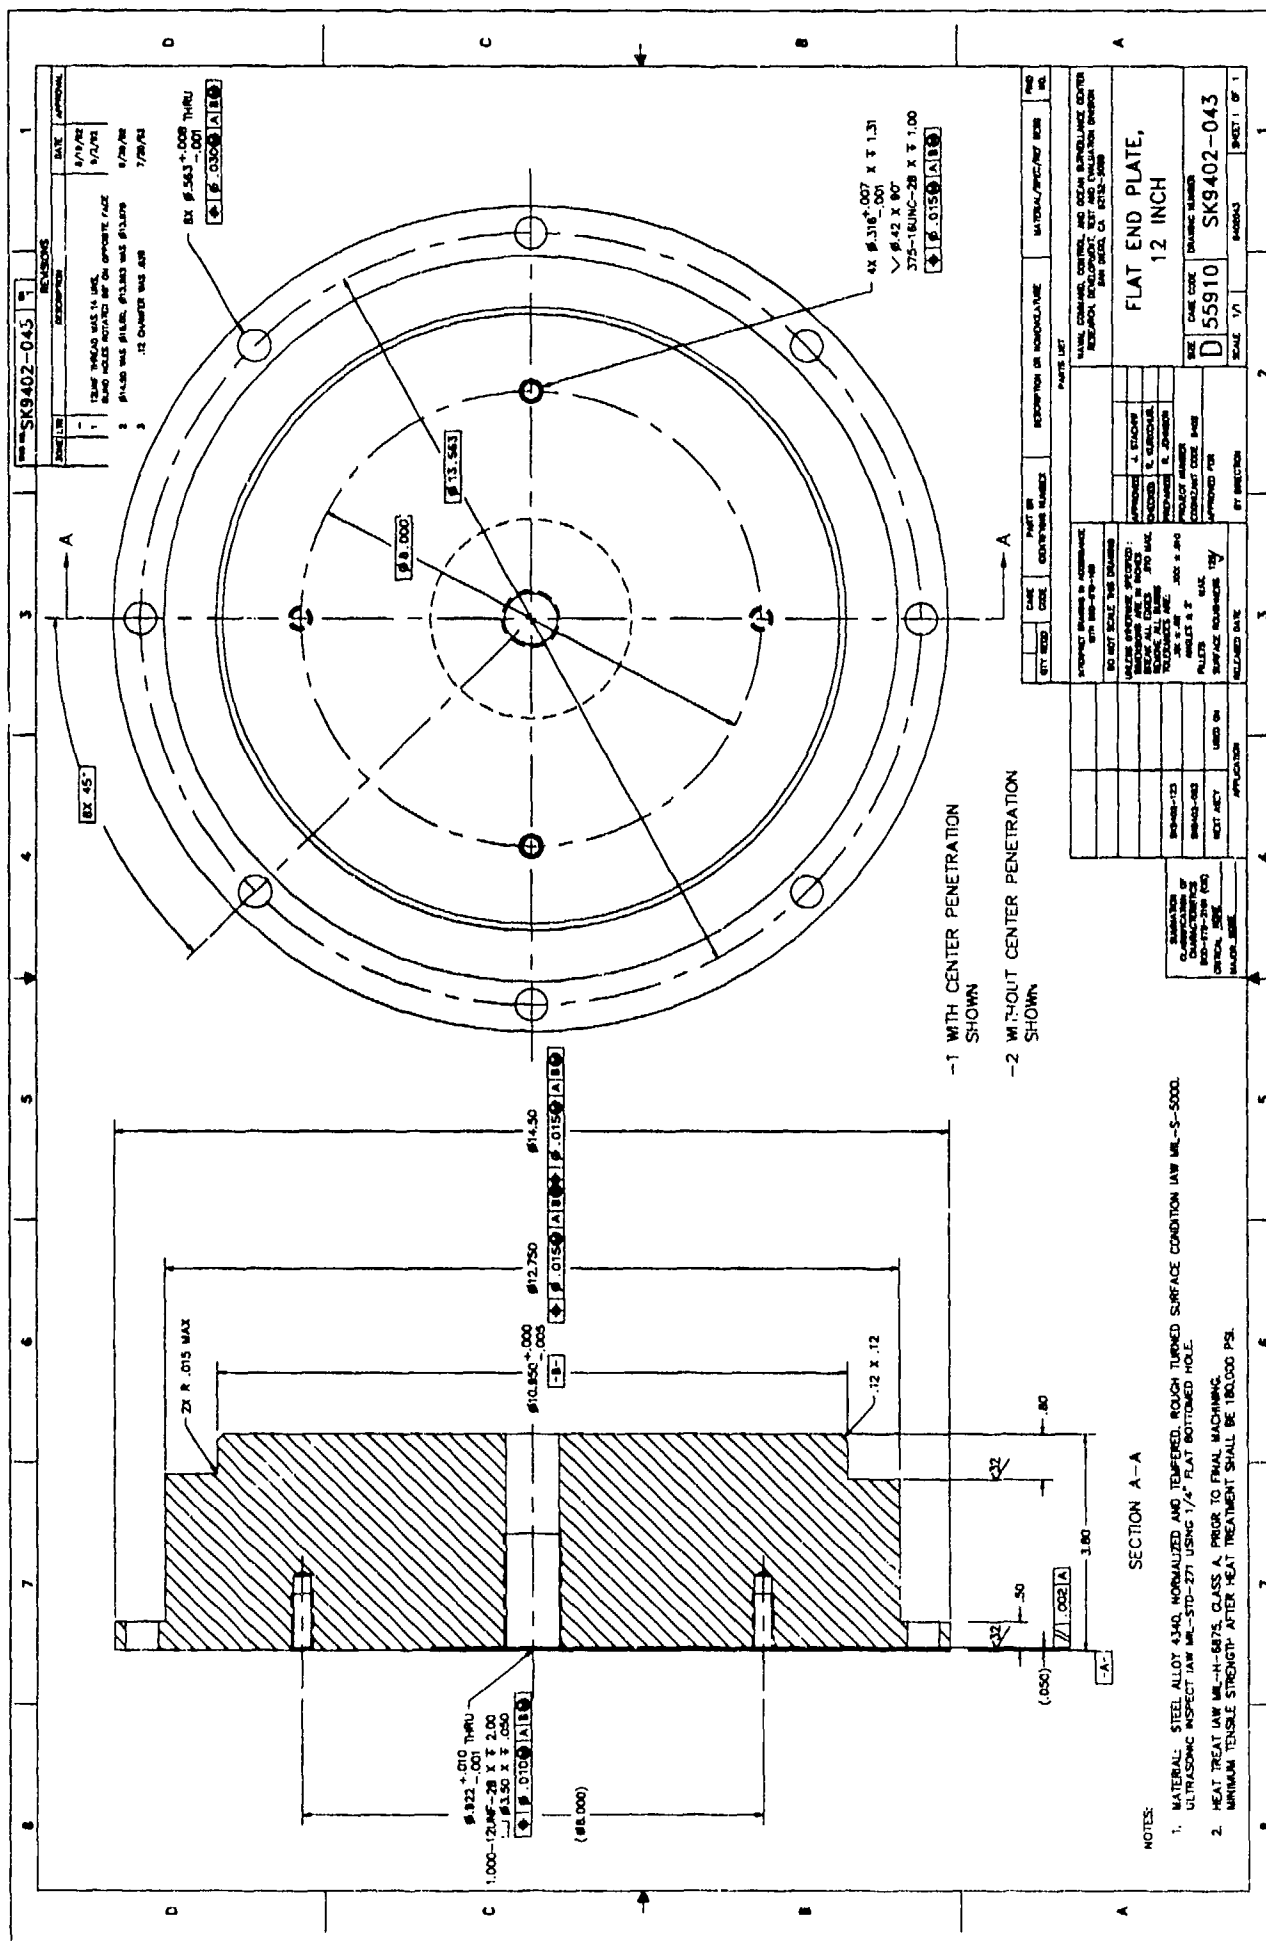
12-inch cylinder test assembly II configuration, Sheet 2.
